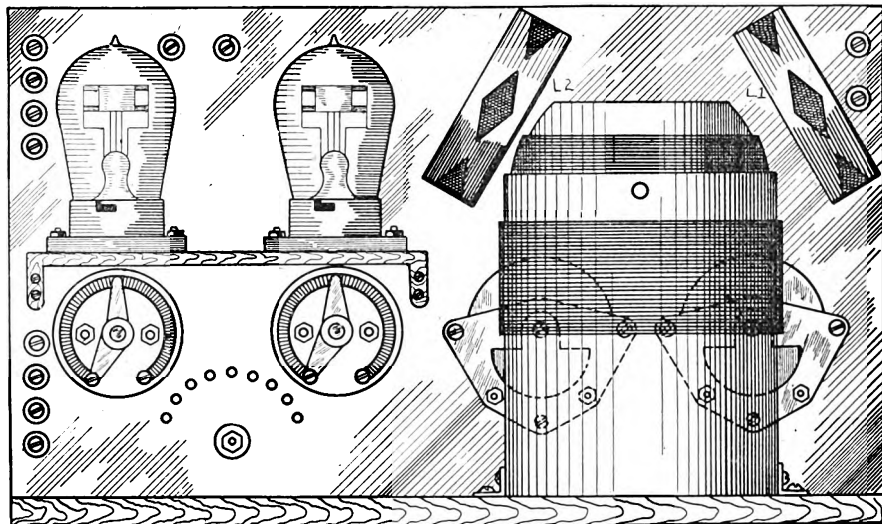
Rear view of the panel, showing the method of mounting the vacuum tubes, vario-coupler, and inductance or honeycomb coils. Suggested by Frederick J. Rumford. Drawn by S. Newman.
